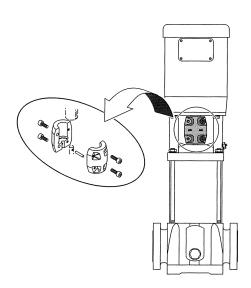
Remove the Socket Head Screws and the Coupling Halves
